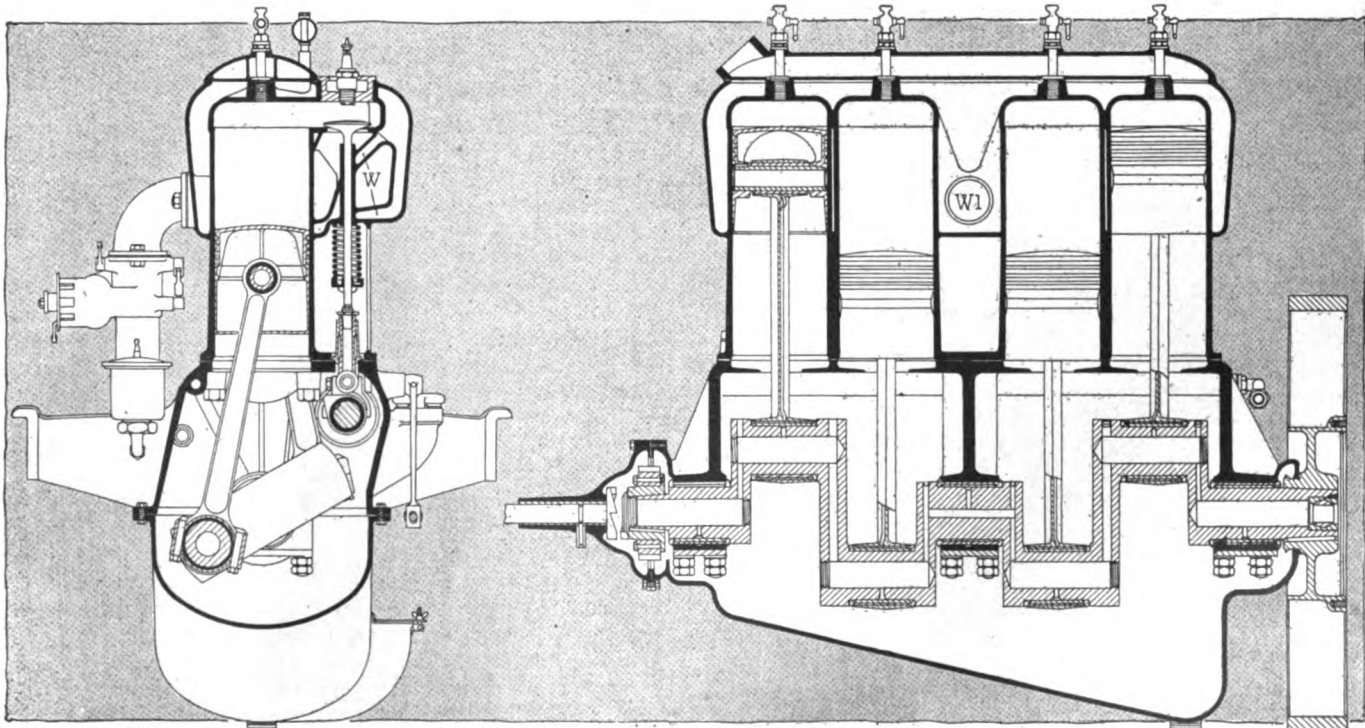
Transverse and longitudinal cross-sectional views through the four-cylinder Fiat motor, illustrating oiling system
